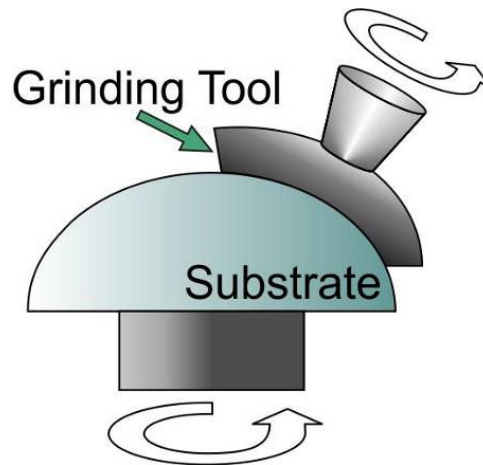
Grinding and polishing arrangement intended to generate macro-scale traditional optics. Tools used to create the desired figure are on the scale of the optic fabricated.
